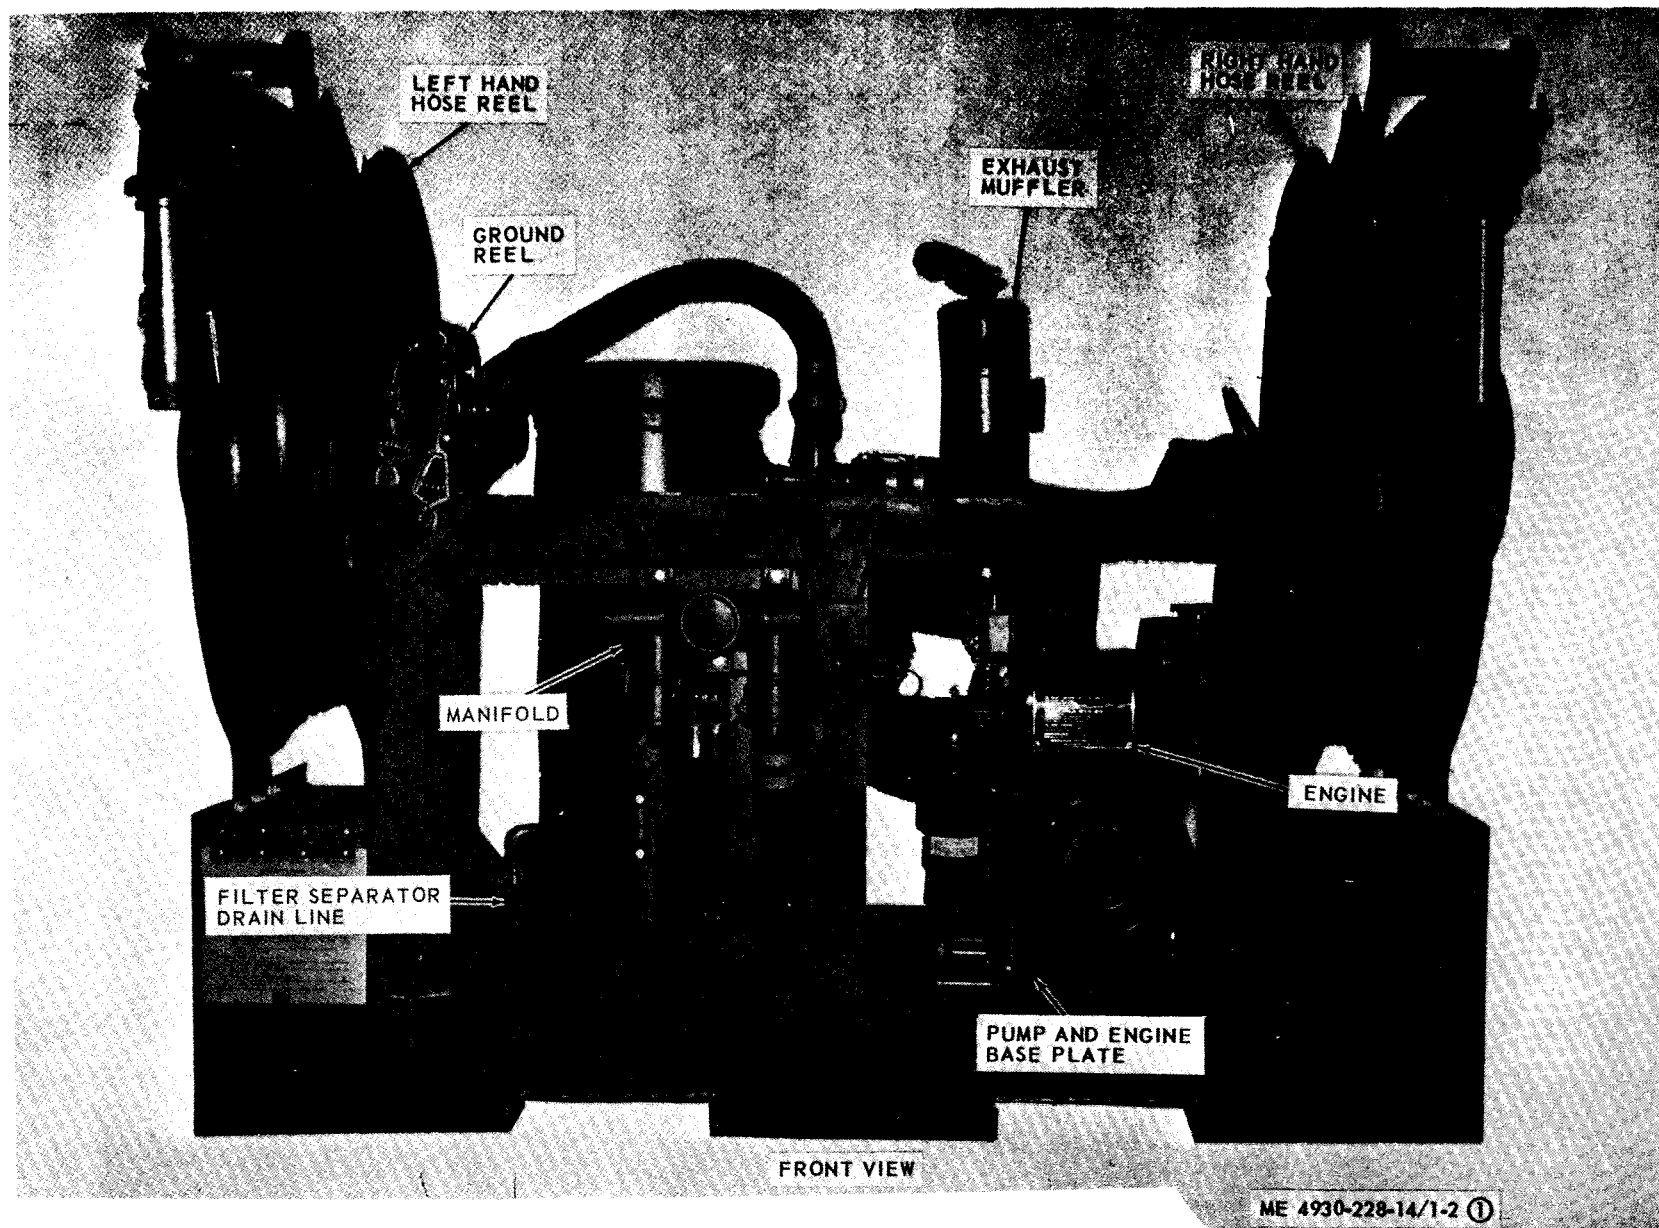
Pumping assembly, front and rear view. (sheet 1 of 2).
